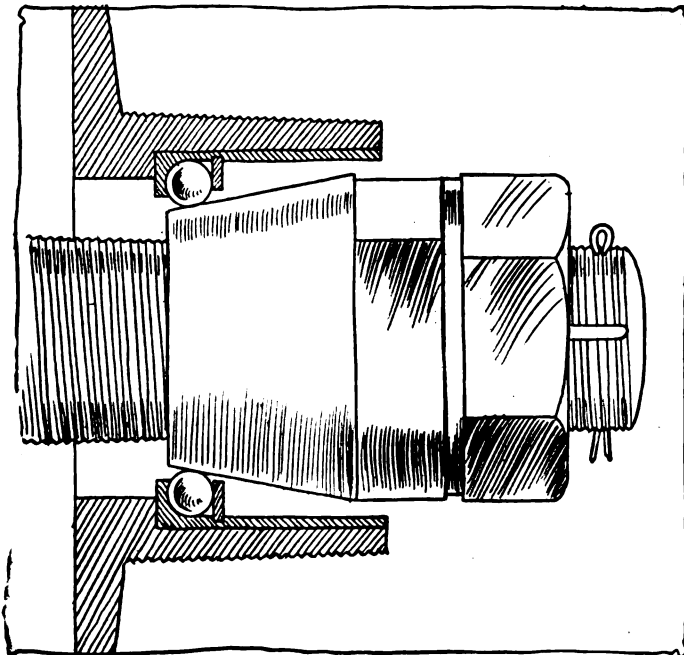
Relative arrangement of parts in an ordinary cup and cone bearing such as used in small runabouts for the front wheel outer bearing. Bearings of this type require occasional adjustment
